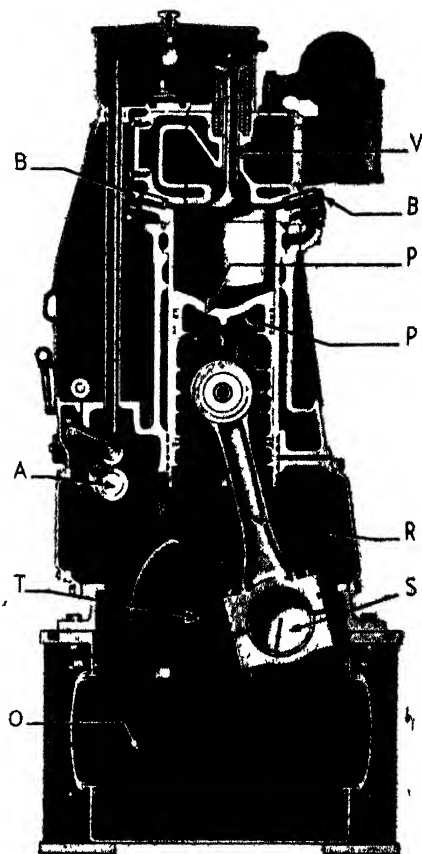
Ingersoll-Rand Diesel with camshaft in crankcase.
